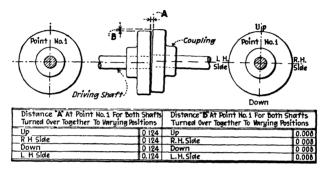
Final check on alignment made by rotating both coupling halves.
